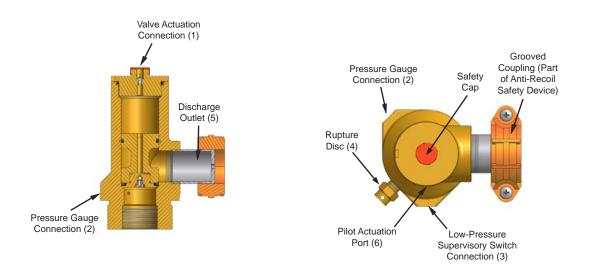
Mv Cylinder Valve Assembly
